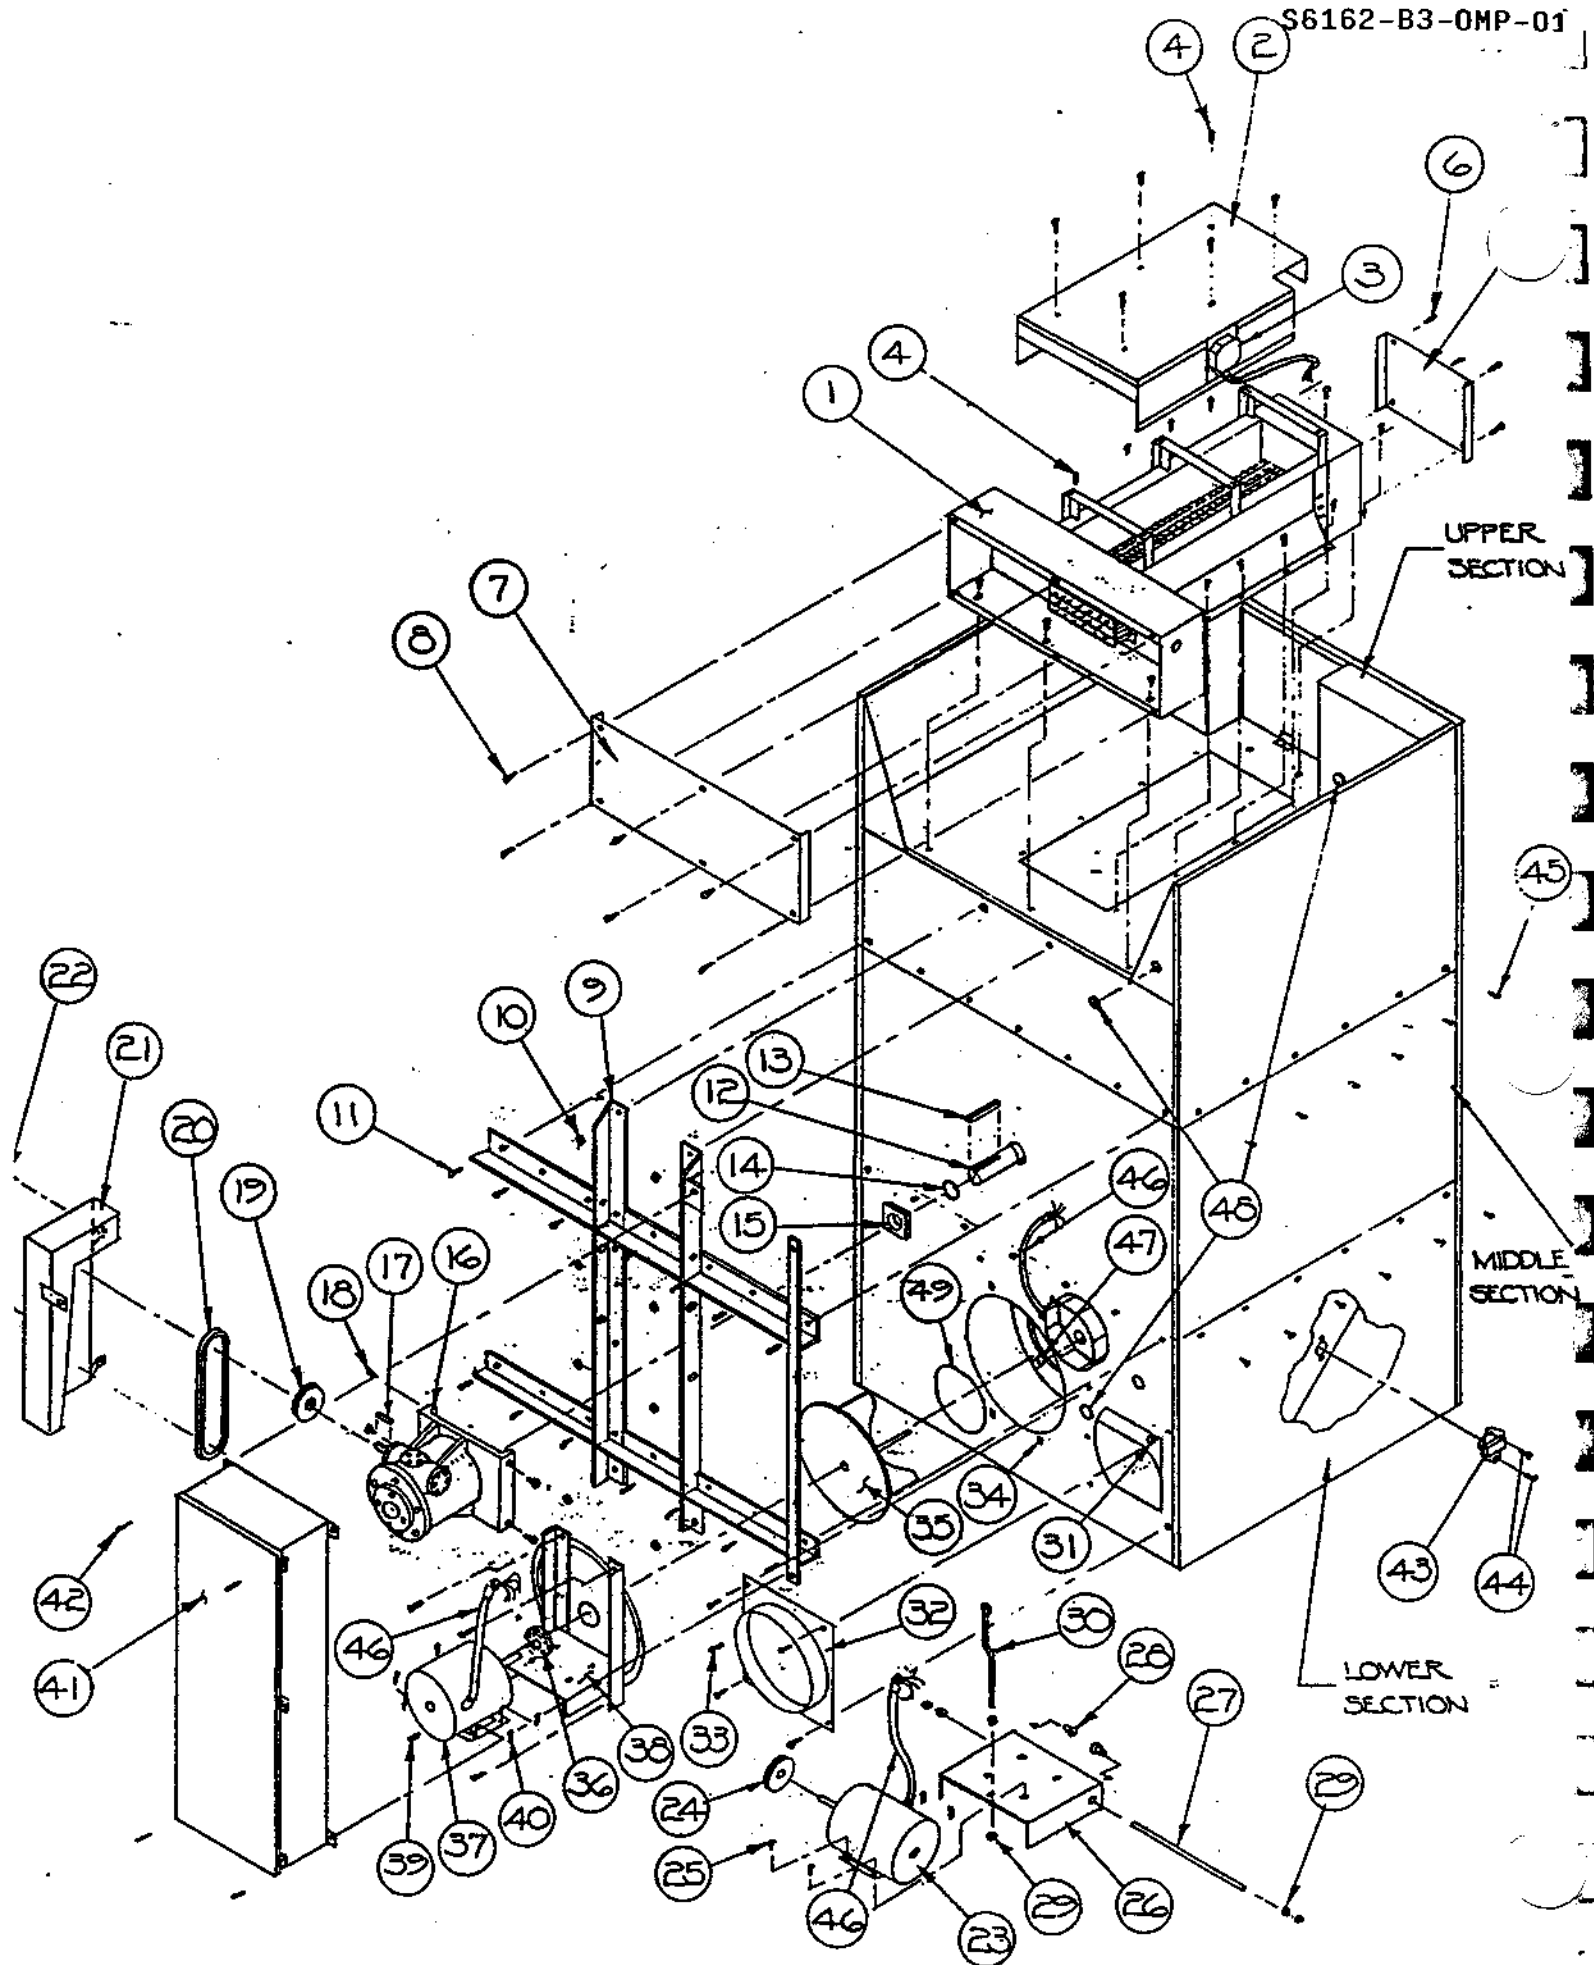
FRONT DOOR AND PANEL ASSEMBLY
